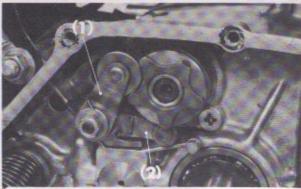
(1) Gear shift drum stopper (2) Neutral stopper
